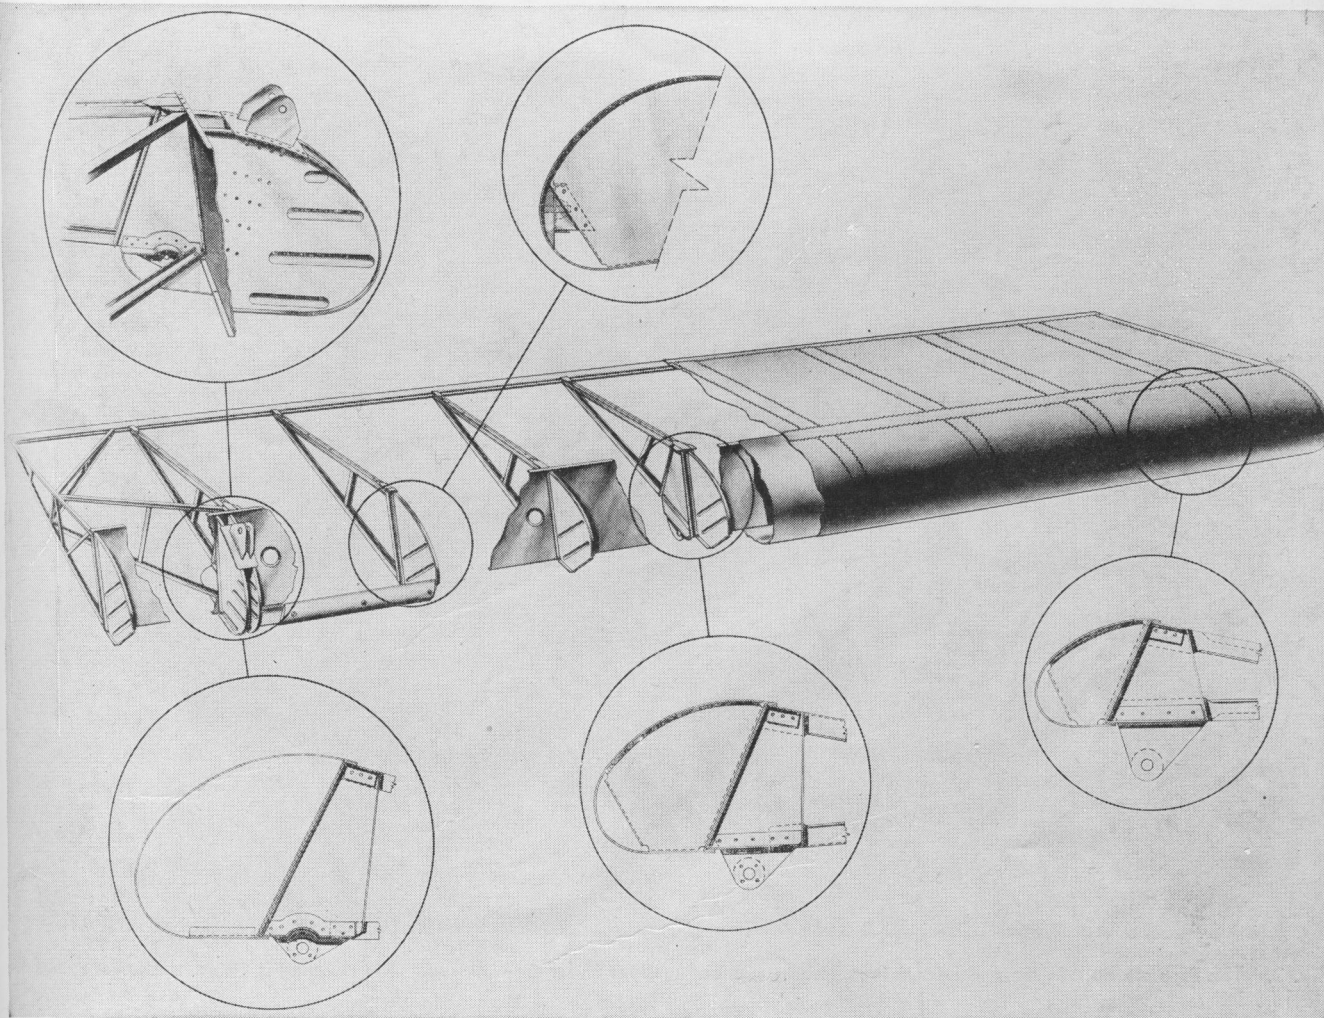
Fabric-covered ailerons built on a D-section box spar. The ribs are built up from 0.008-in. stainless steel. The hinges are 0.040 in. thick; horn, 0.050 in. The aileron area is 21.4 sq ft.
